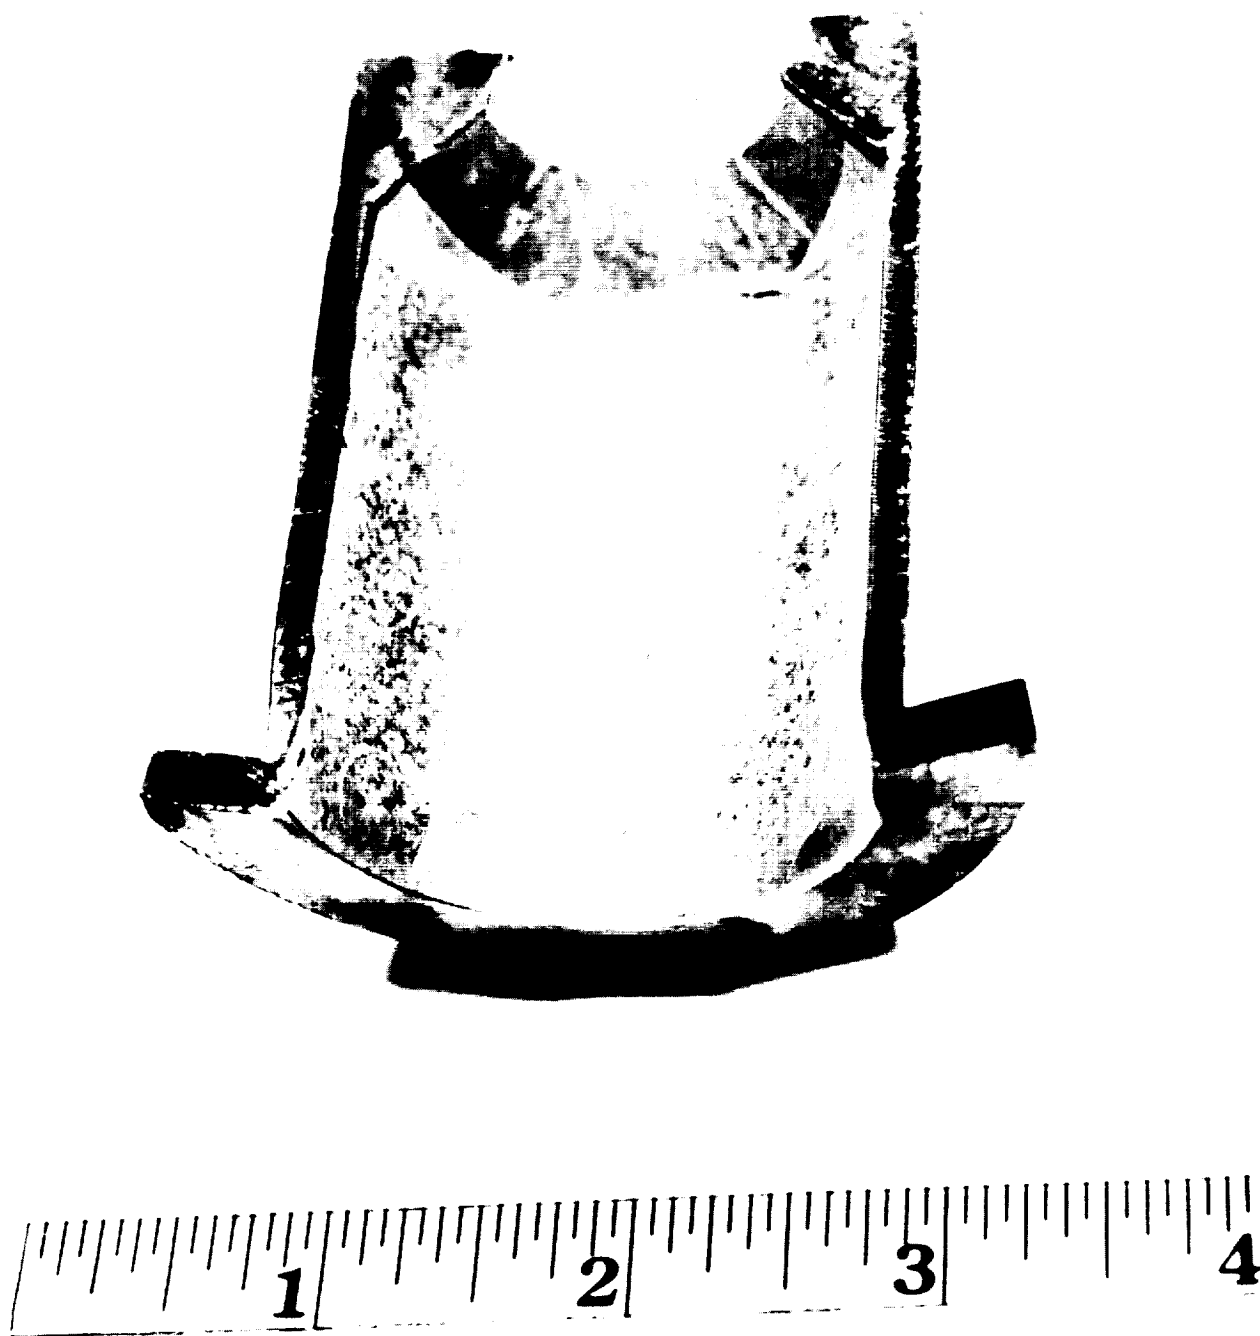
Stainless Steel Engine Section Loaded with a Single Layer of the NG-EGDN-Cellulose Explosive Film.
